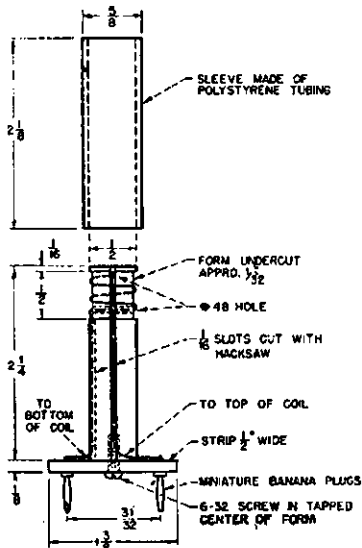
Dimensions for the Dipper plug-in coil forms.
